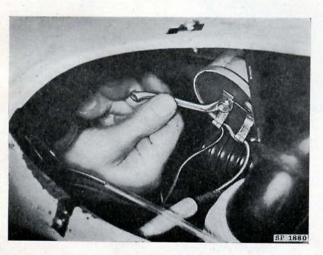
Adjusting the wiper motor self-parking switch pin
